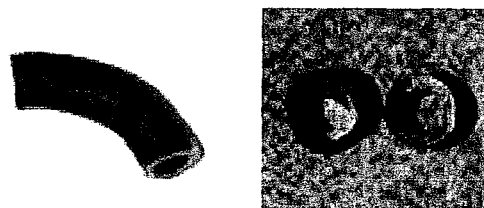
A sectional view of the products of curved tubes without any bending defects
